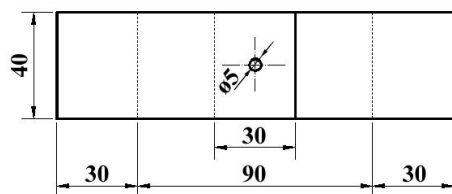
Specimen dimensions with one clinched joint for the tension test
